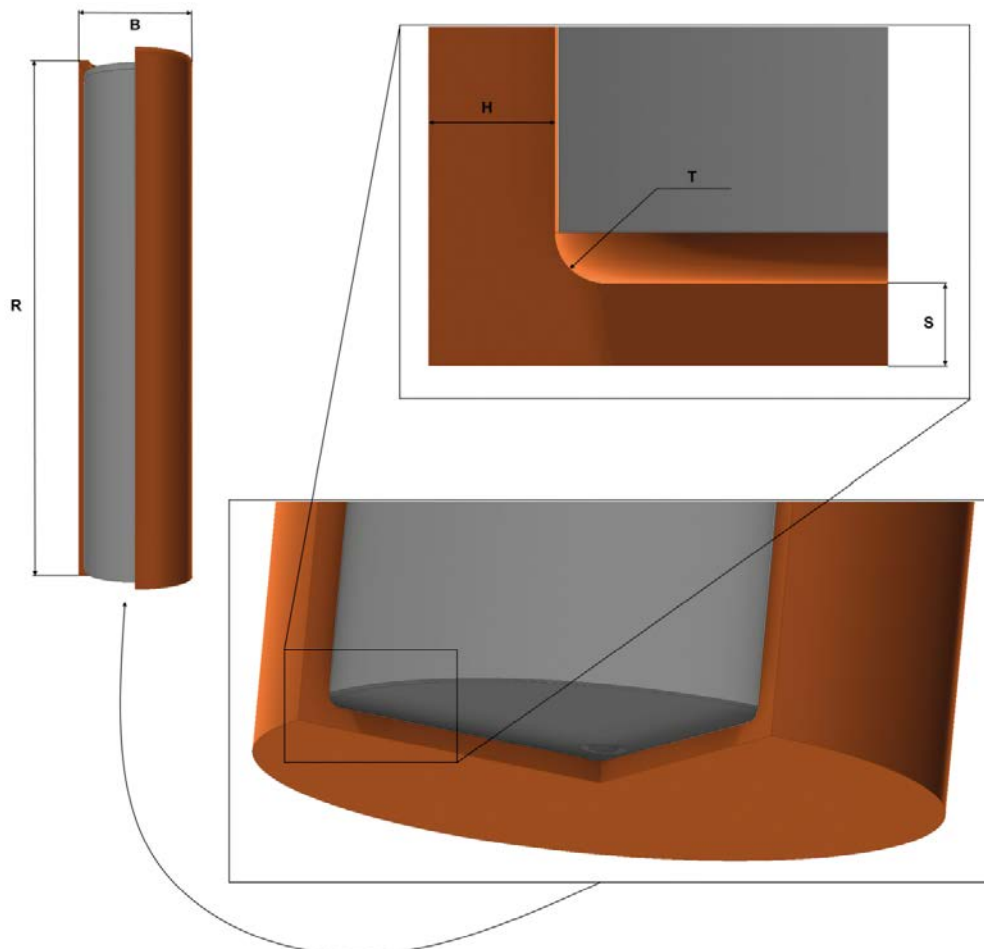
Cross section of the copper shell using the pierce and draw method and the main dimensions.
